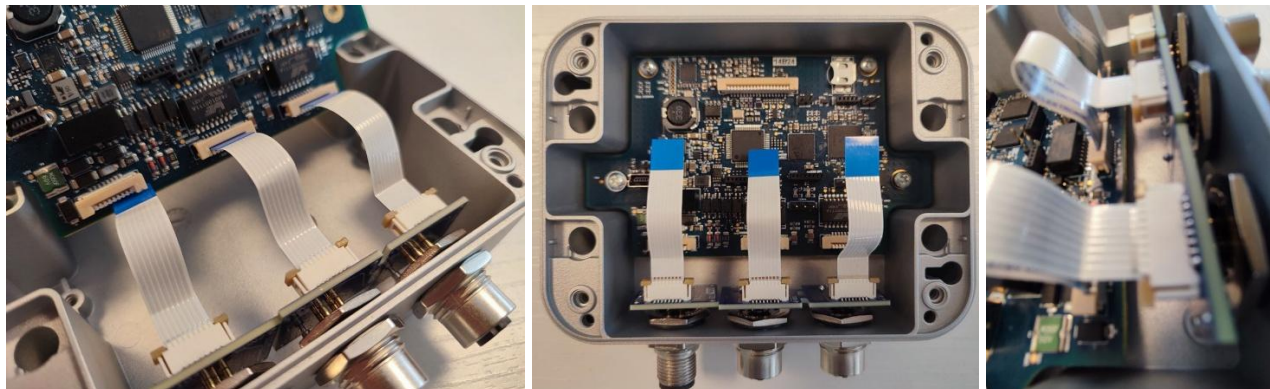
Insert the connector PCBs in the milled holes and the FPCs as shown.
